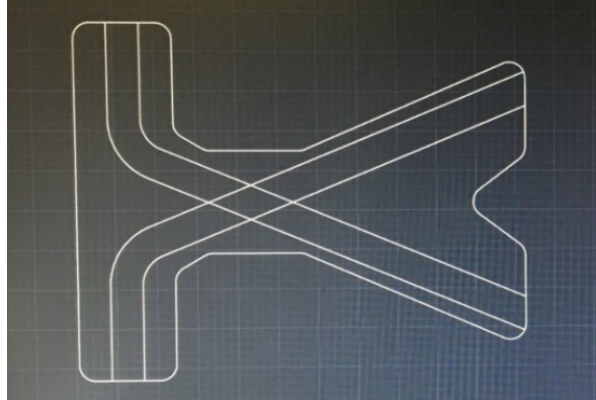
AutoCAD drawing of the material breastplate size, shape, and strap placement.
